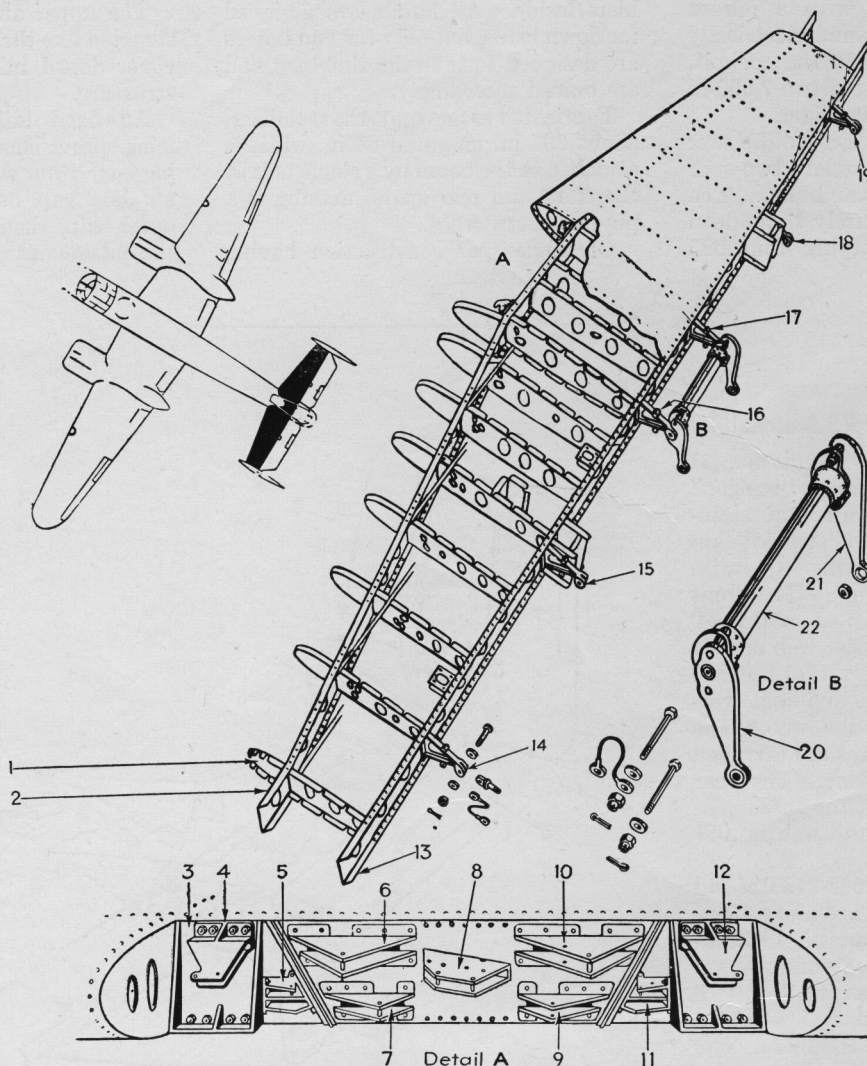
Structural details of the horizontal stabilizer: (1) rib; (2) front spar; (3) front spar fitting; (4) to (12) brackets; (13) rear spar; (14) to (19) elevator hinge brackets; (20) (21) elevator horns; (22) elevator connecting tube.
